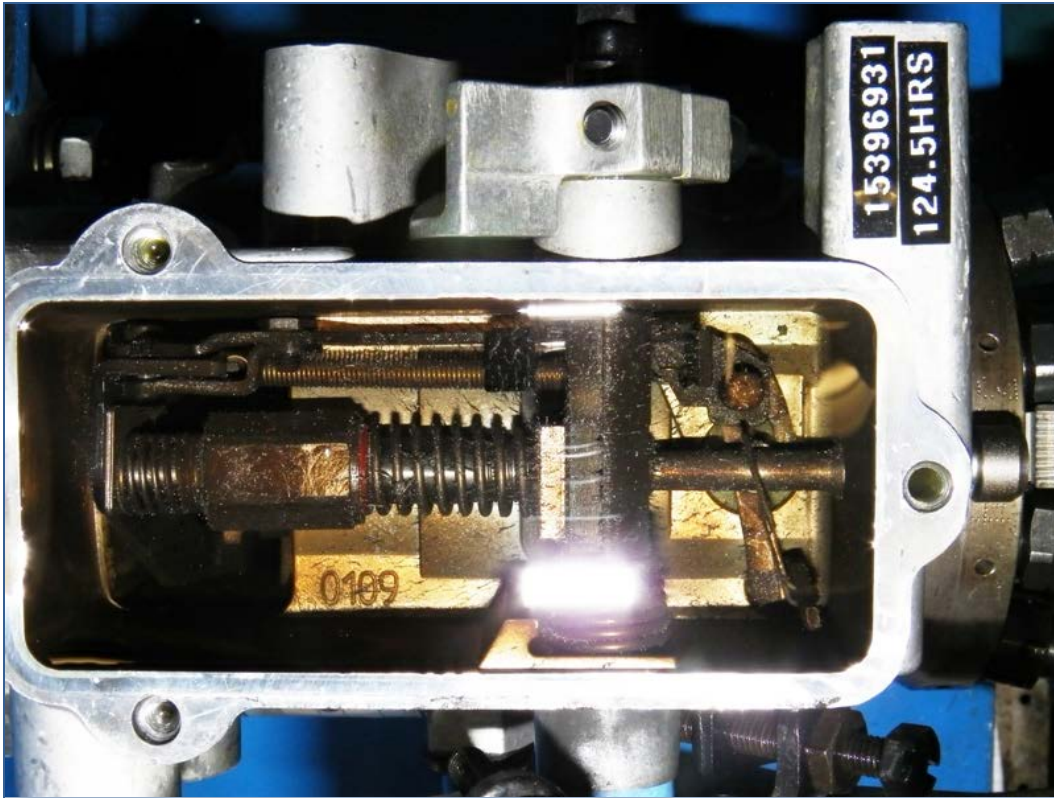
Test 5, Pump 1 (Operating Pump Removed from Testing) Linkage Debris
